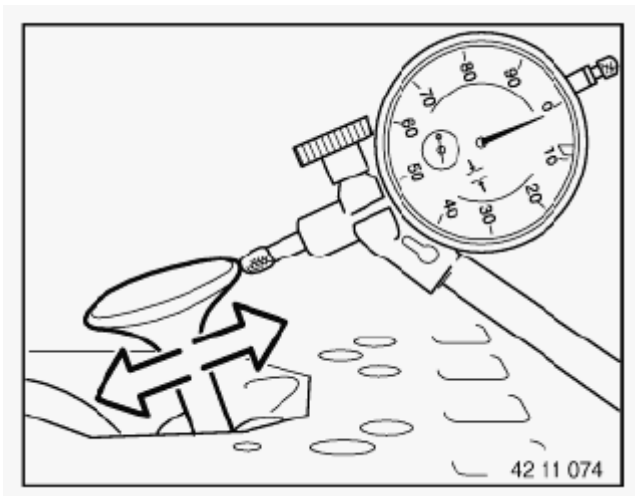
Identifying Valve Guide Wear - Tilt Angle (K)
